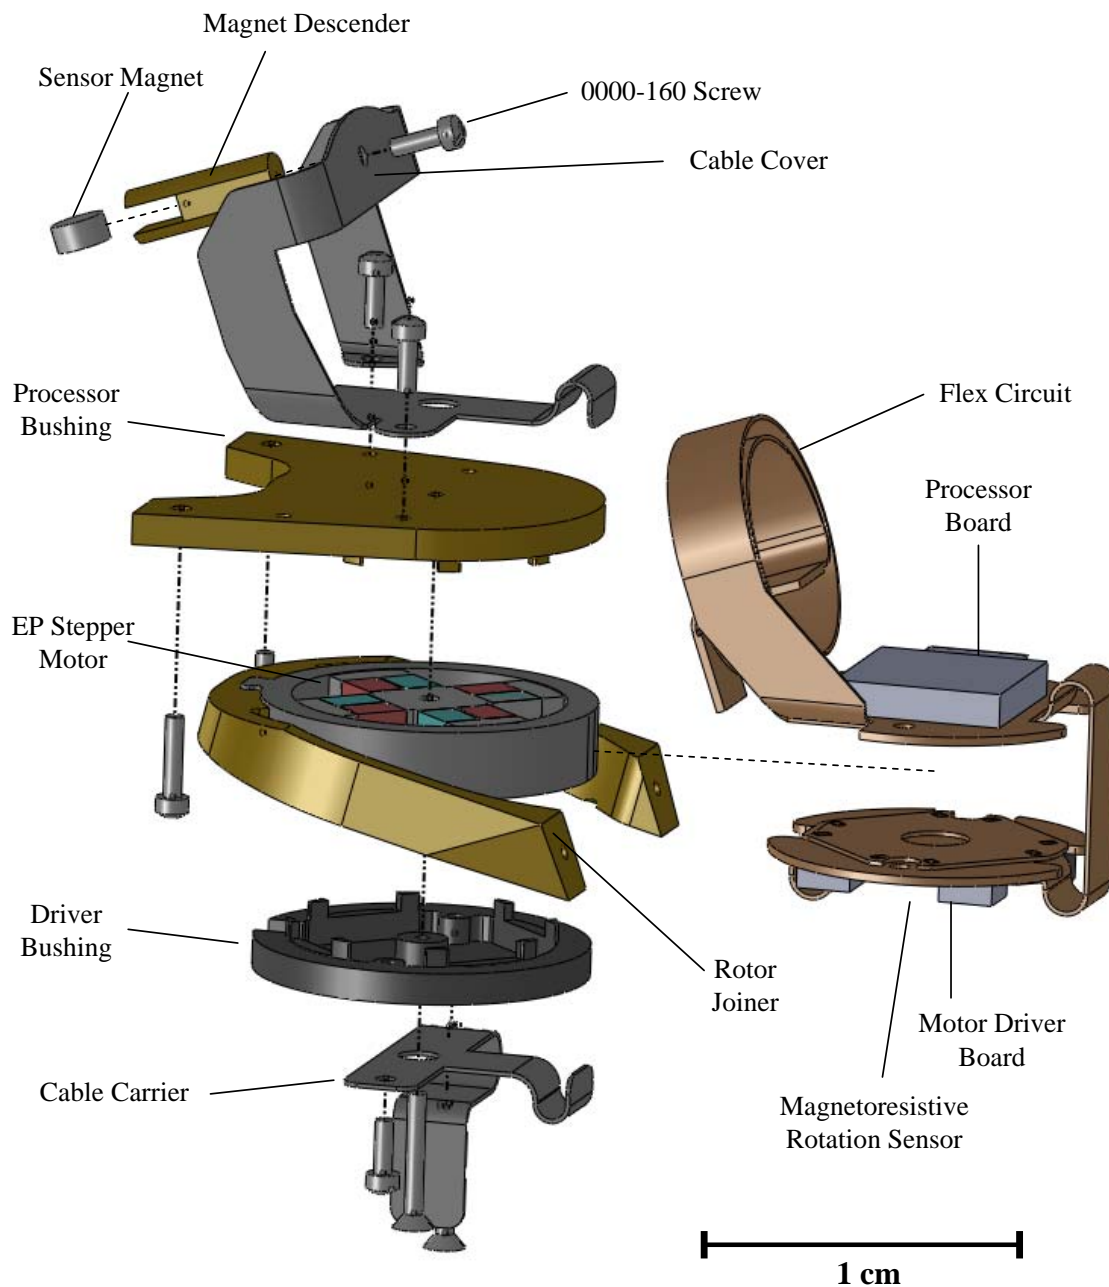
Millibot module exploded view. This assembly is repeated for each joint. One segment of the continuous flex circuit is shown in its folded configuration. The electropermanent stepper motor rotates the rotor joiner relative to the rest of the assembly. The rotor joiner connects to the processor bushing of its neighbor using two screws. See Figure 6-4 for an assembled view.
